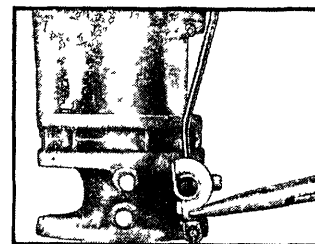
R move throttle shaft to right and disconnect rod. Disconnect rod at upper end
